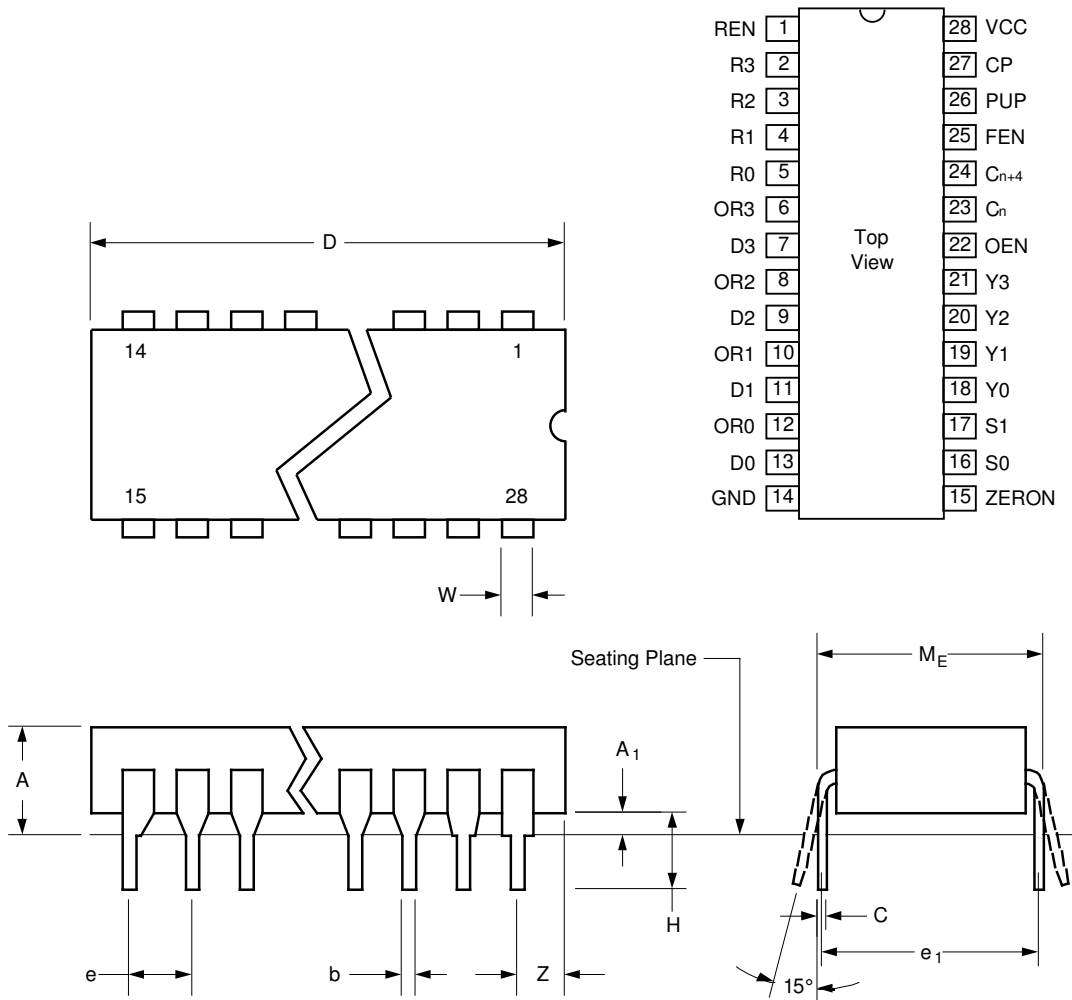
28-Lead Ceramic DIL (Solder Seal) - Package Style C
